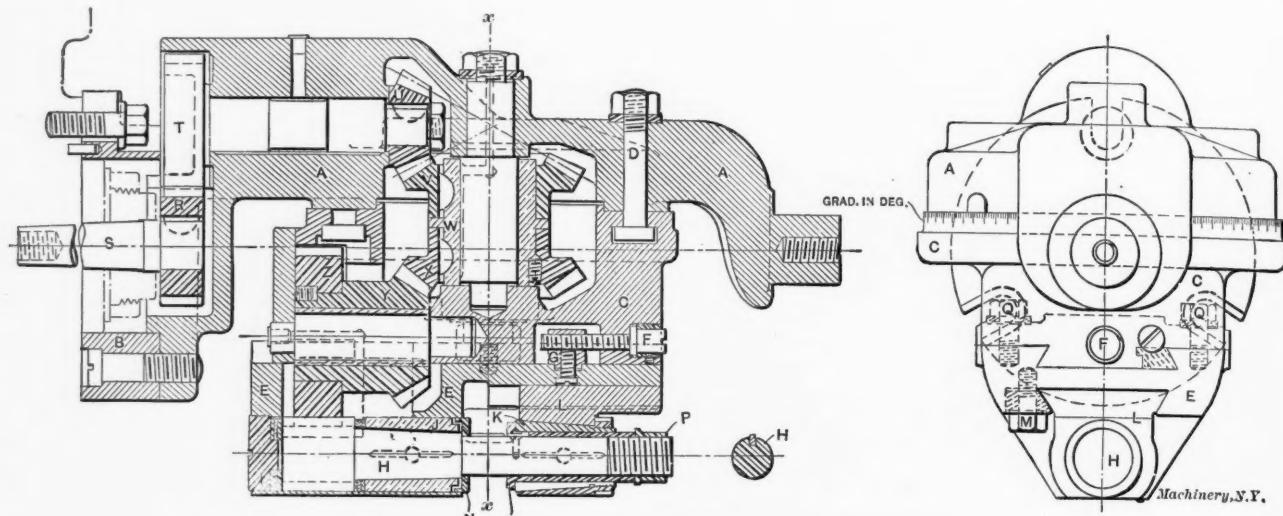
Details of Construction of the Spiral Gear Cutting Attachment.
